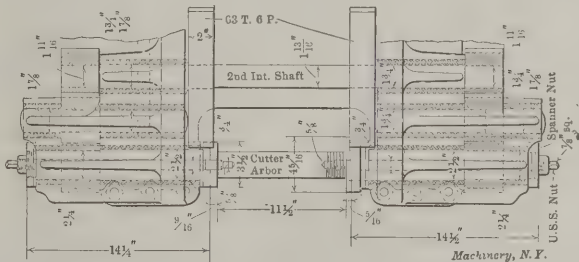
Spindle Driving Mechanism of the Walcott Rack Cutter.
